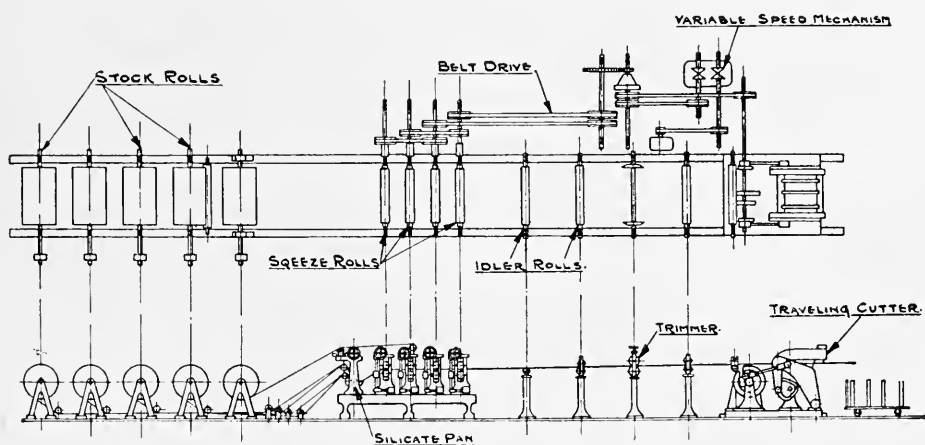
Plan and Elevation of Combiner for Solid Container Board or Wall Board.
